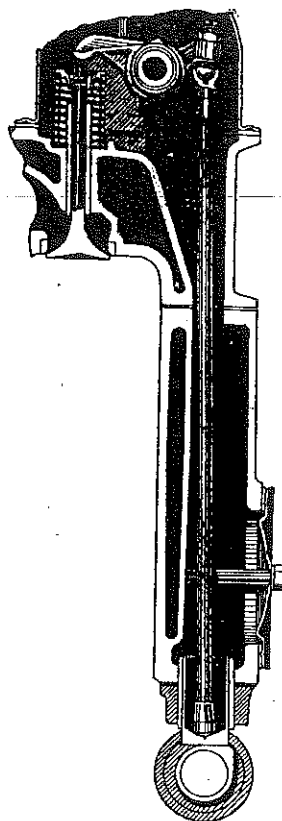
Valve mechanism on 361, 426, 451 and 477 engines
